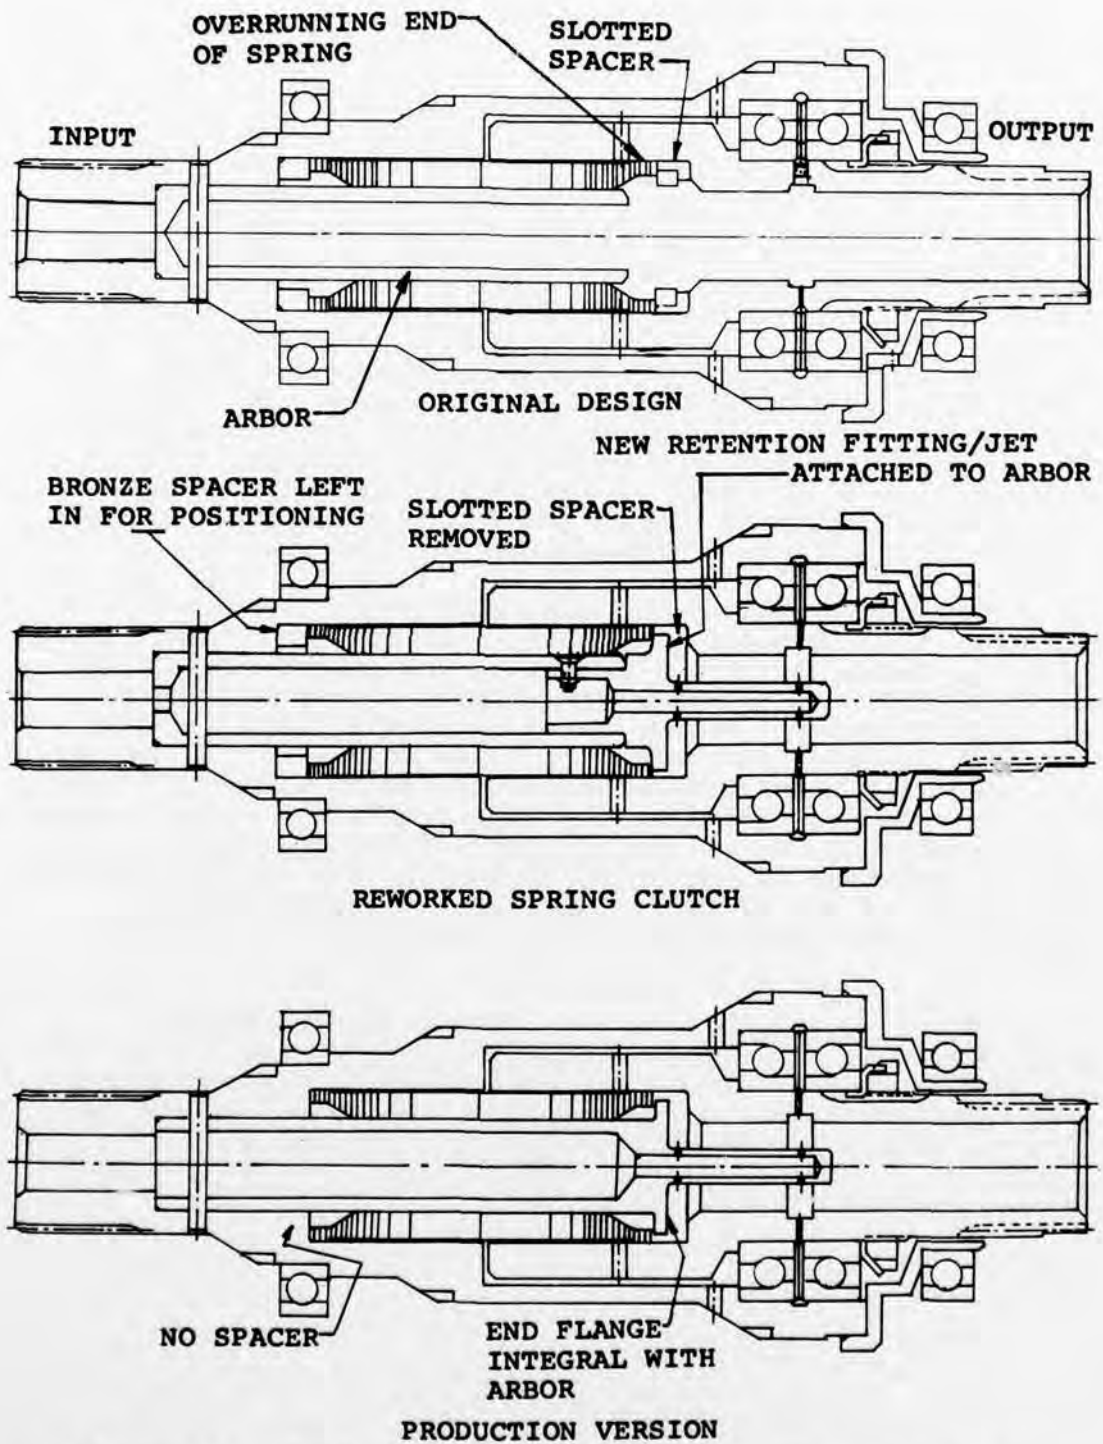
Spring Clutch Redesign With Flanged Arbor.
